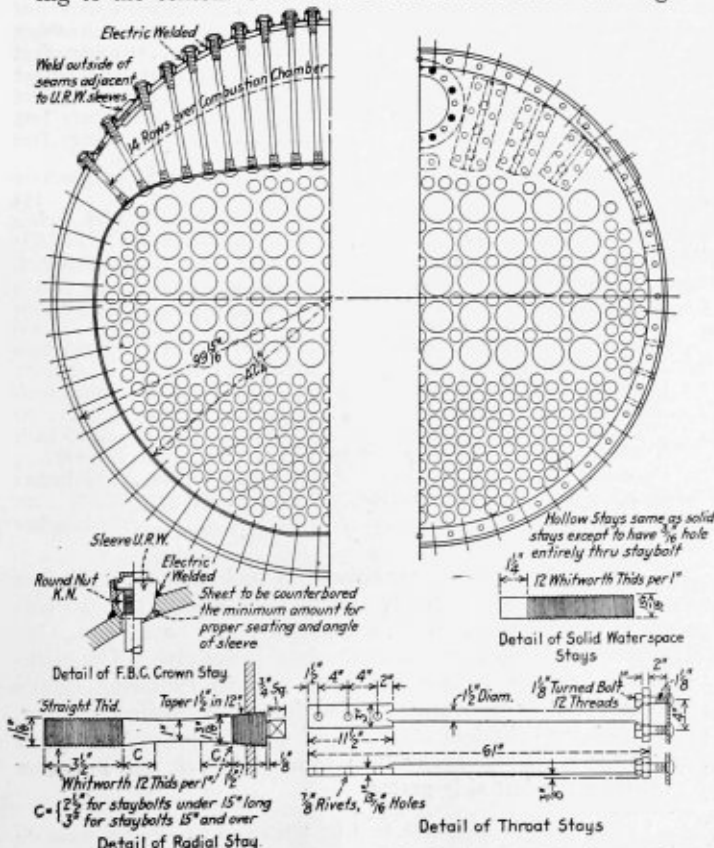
Sections of Boiler Through the Combustion Chamber and at the Front Tube Sheet, with Details of Stays Used for Bracing
